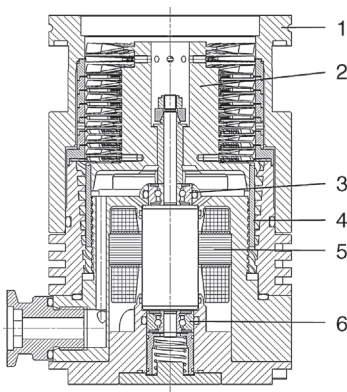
Turbomolecular pump TW 70 H with grease-lubricated ball bearings. 1: housing; 2: rotor; 3: ball bearing; 4: *Holweck* sleeve; 5: motor; 6: ball bearing.
